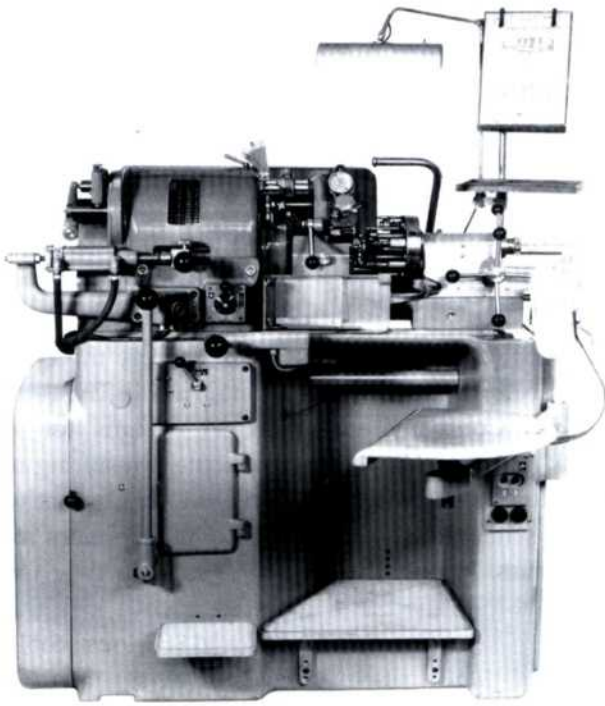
The Boley RD 25 Turret Lathe, made in Esslingen/Neckar, Germany, and used for making most of the small stainless steel parts in the drinks dispenser units from late 1960
